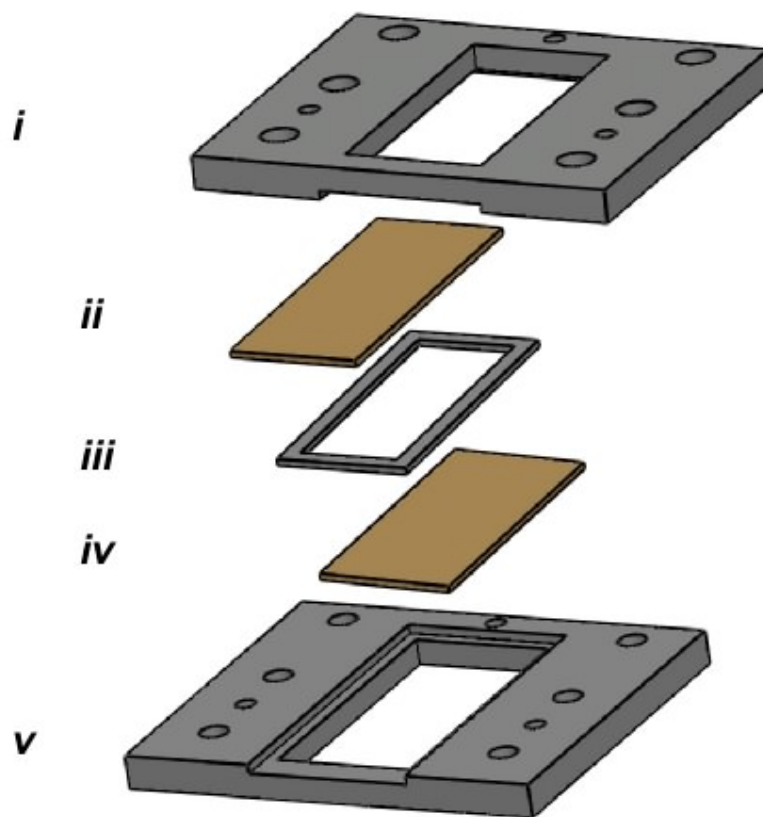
Schematic of the sample holders and the test setup allowing optical microscopy. *i*: top holder, *ii*: top electrode, *iii*: spacer (shim), *iv*: bottom electrode, *v*: bottom holder.
